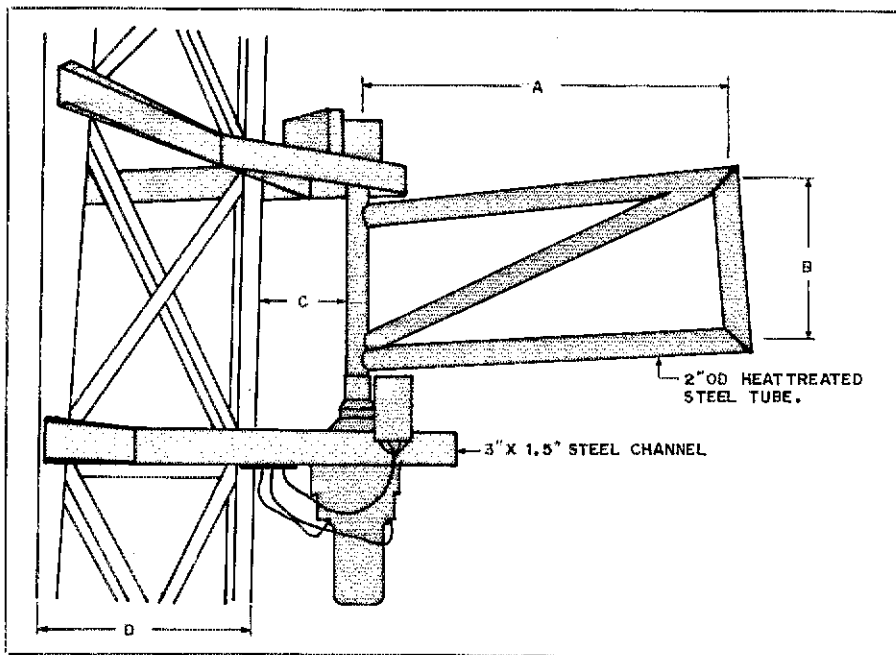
Dimensions for the side-mounted rotator: A — 33 inches; B — 13 inches; C — 9 inches; D — 20 inches.
